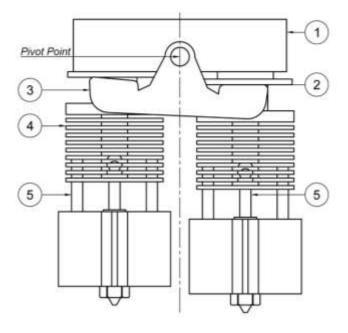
Drawing of a Dual Hot end lifting mechanism
